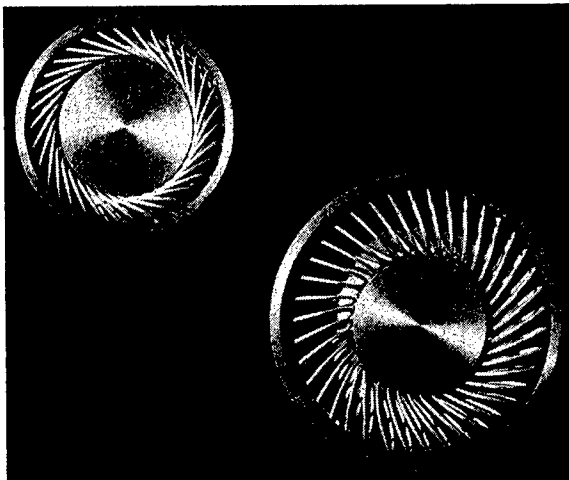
Collapsed toroidal contactors indicating the tolerance permitted in cylindrical parts.
